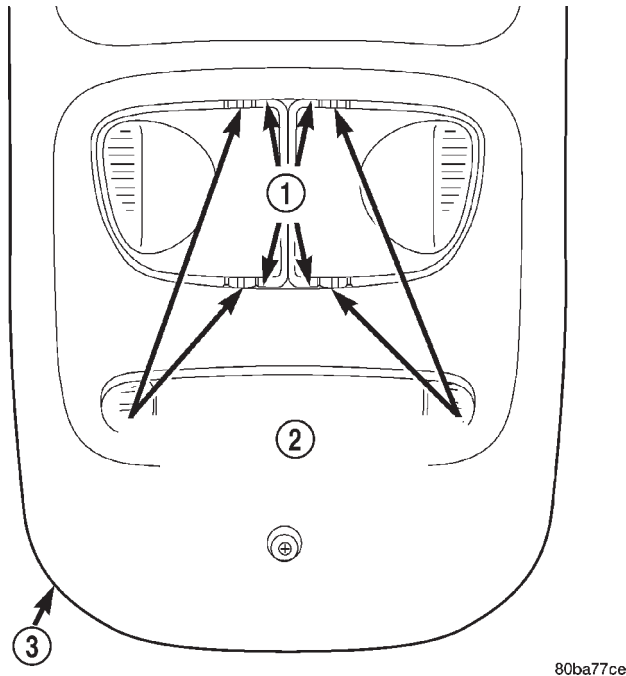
Overhead Console Reading and Courtesy Lamp Lens Remove/Install
